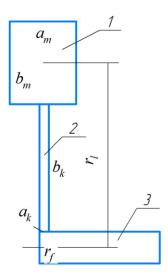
The front surface of the hammer and handle: 1 – hammer, 2 – prop, 3 – roller.
